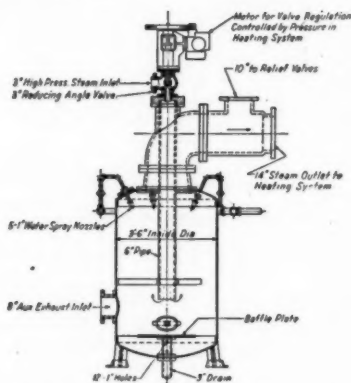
REDUCING VALVE—DESUPERHEATING TANK
